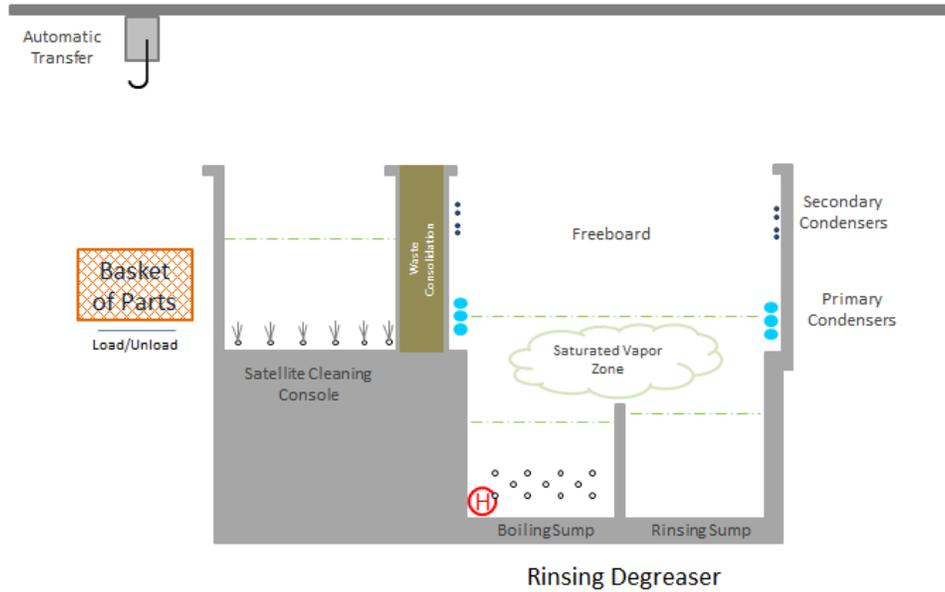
Cleaning Machine Designed for the Duo-Solvent Process
